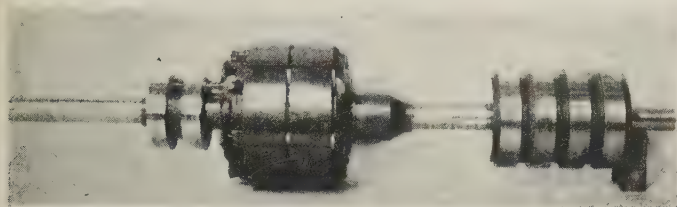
(below). Rotor of single phase harmonic generator with switching rings mounted on shaft
